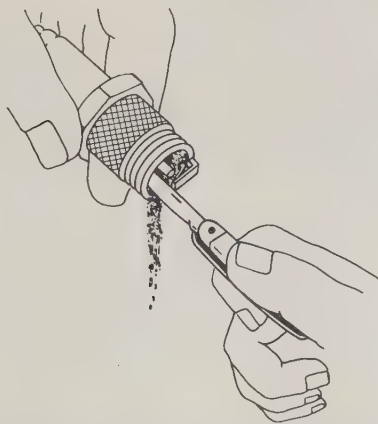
Cleaning carbon from the spark-plug shell with a sharp knife.
